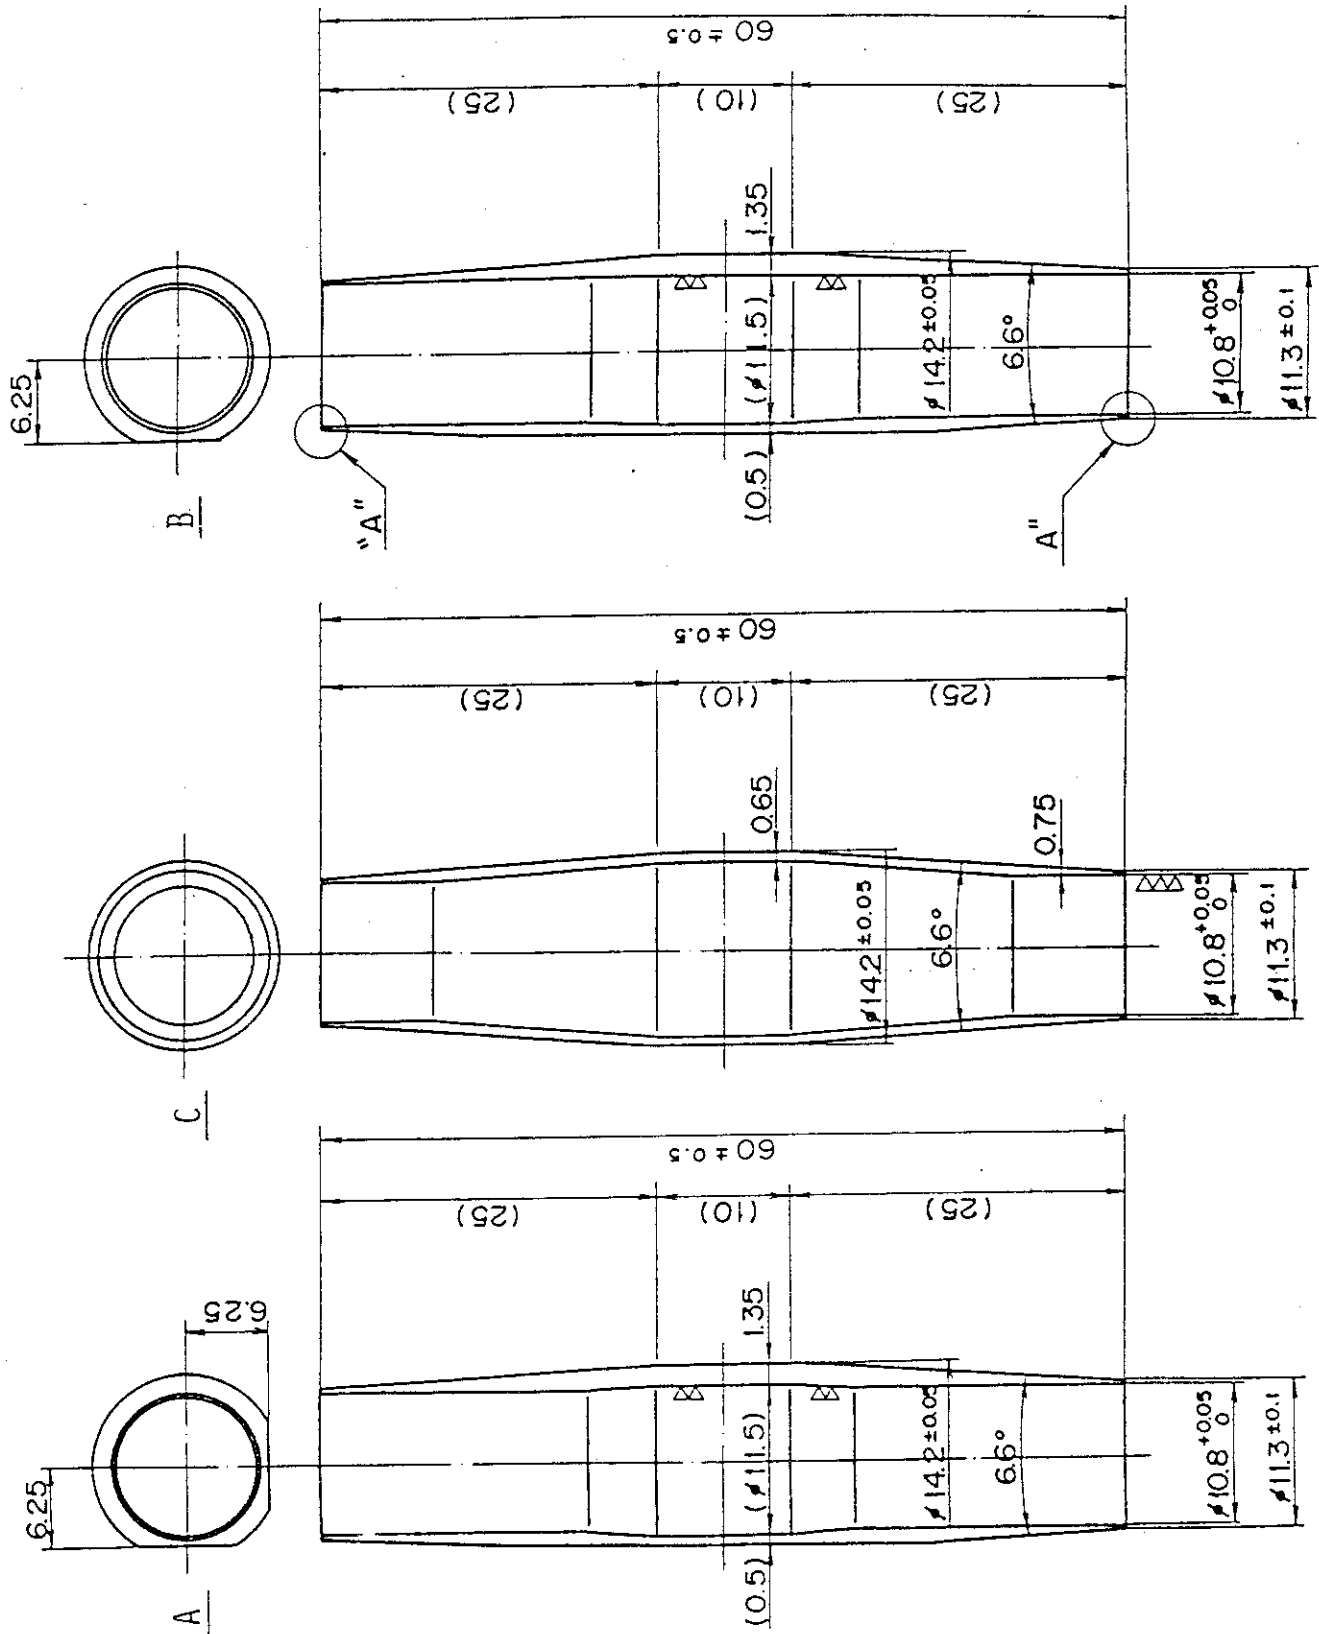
Configuration and Dimension of the Three Kinds of Blockage Sleeve
